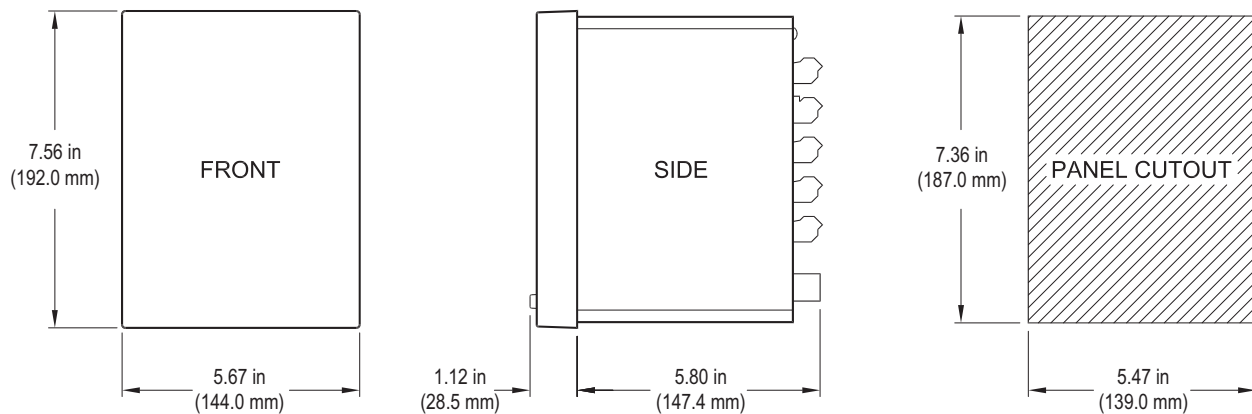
SEL-700G Dimensions for Rack- and Panel-Mount Models
